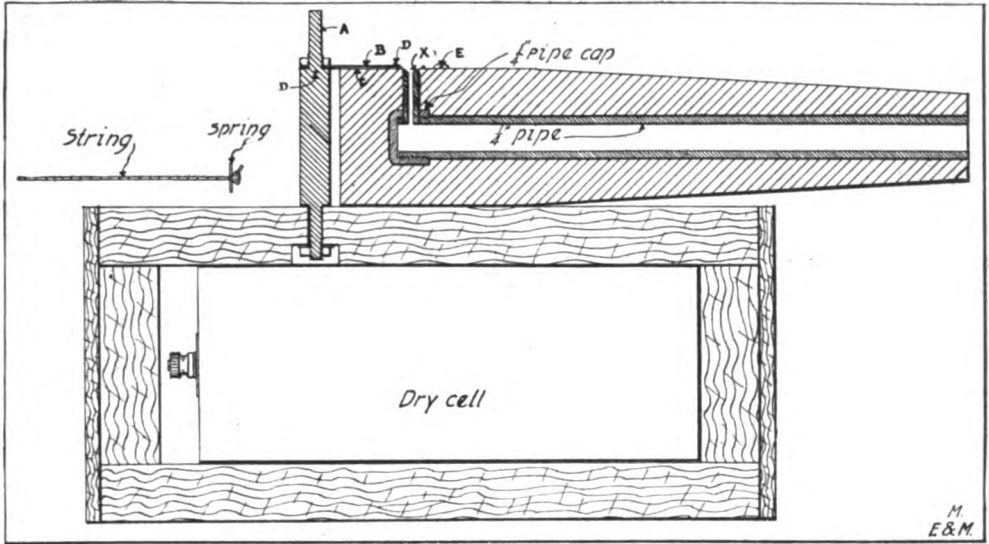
SIDE VIEW OF THE FINISHED CANNON, SHOWING THE METHOD OF MOUNTING AND THE BATTERY BOX
